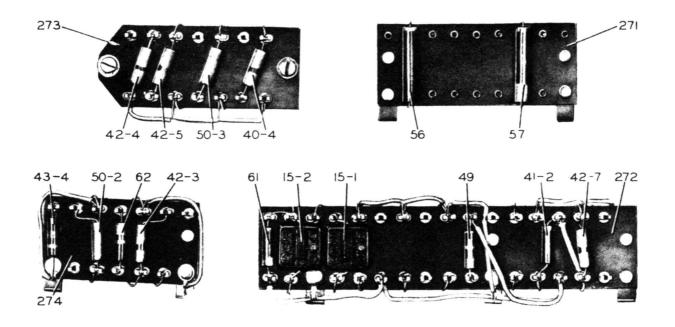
RADIO RECEIVER BC-224-B: RESISTOR BOARDS, VIEW A
